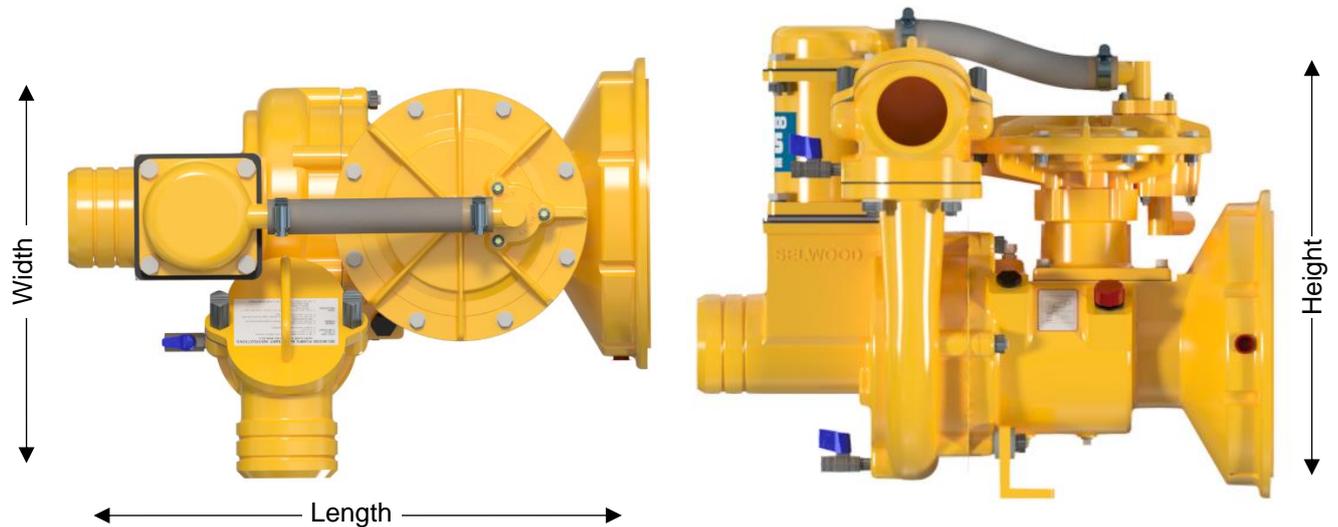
Left, body unit top view and dimensions. Right, body unit side view and dimensions.
